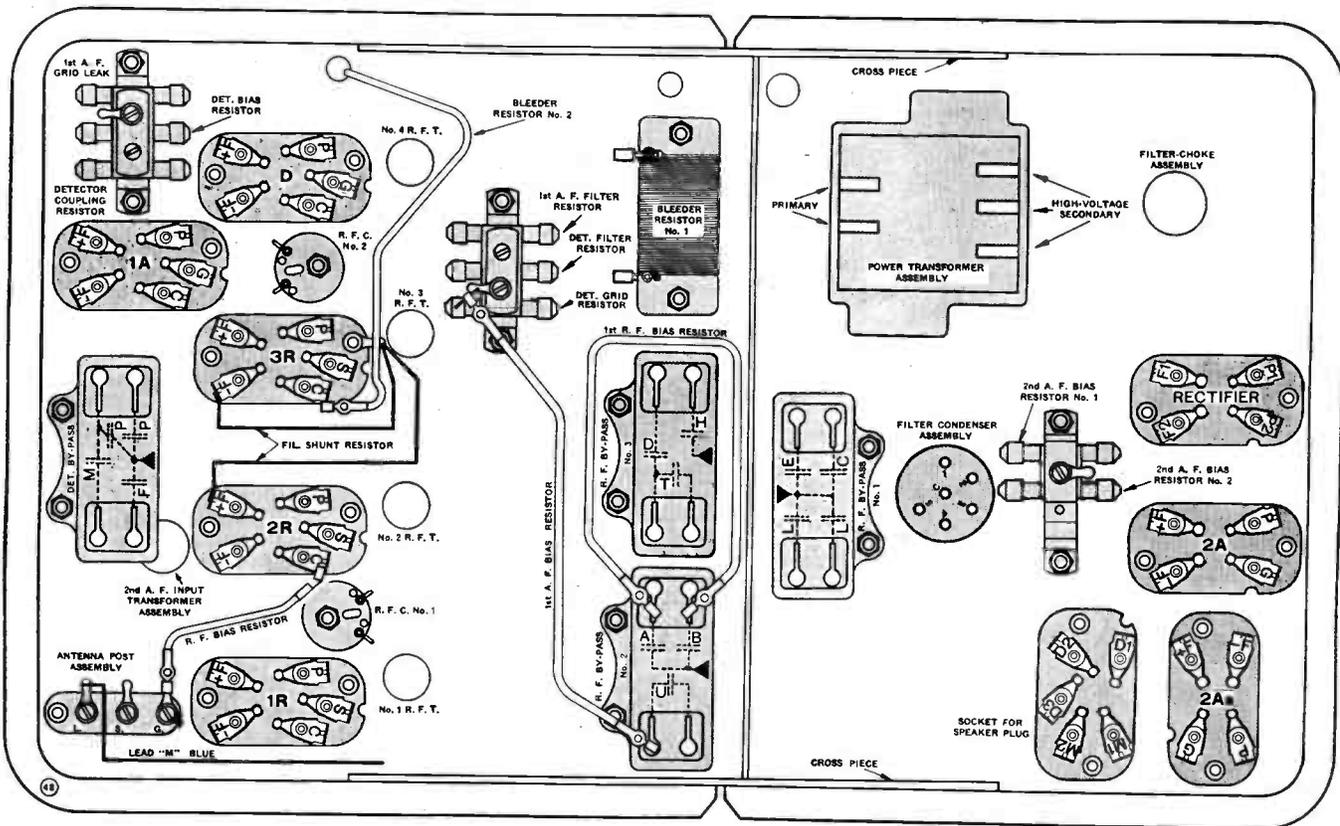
BOTTOM VIEW OF TYPE L-2 AND P CHASSIS.
